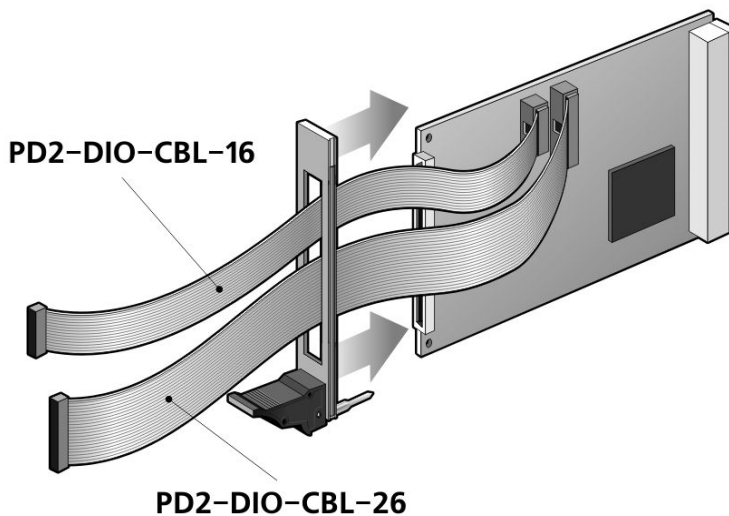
Passing cables for J2 or J6 through the mounting bracket on a PDXI-DIO board.
